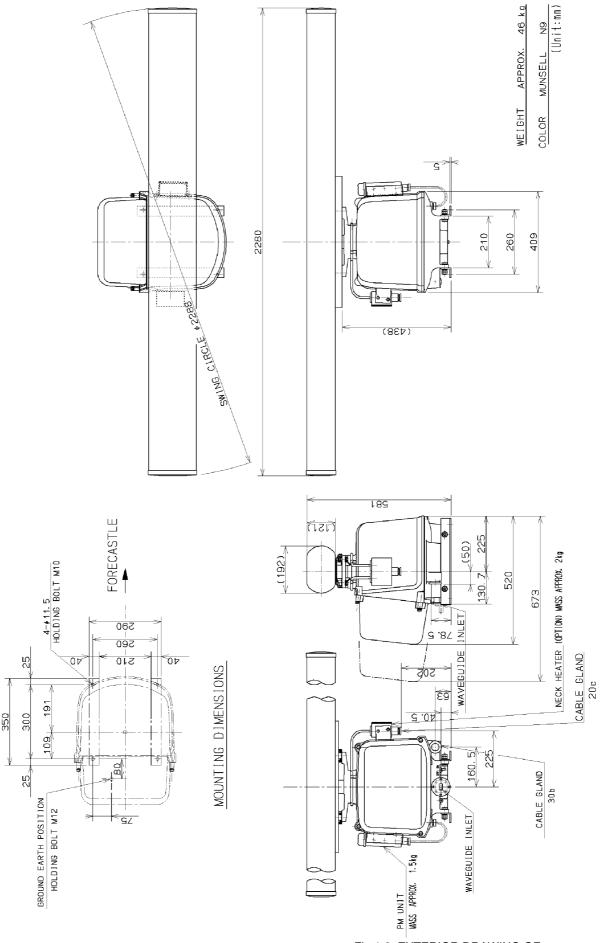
EXTERIOR DRAWING OF SCANNER UNIT, TYPE NKE-1059-7
